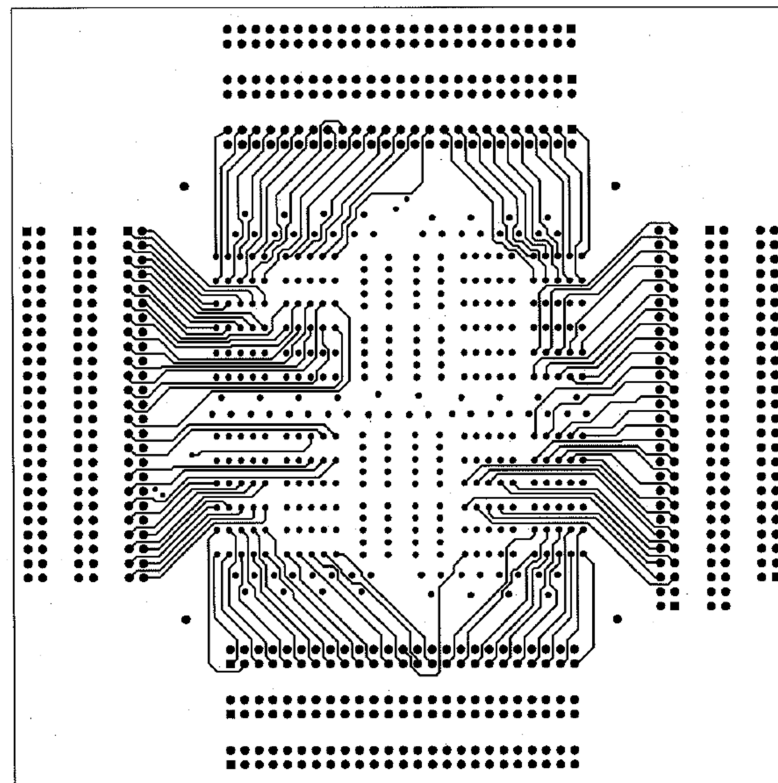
Pin array PCB Inner Layer 2 and Bottom Layer
